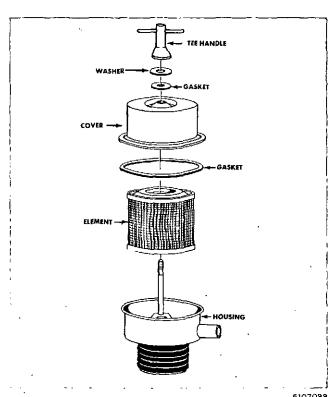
Crankcase breather – paper element – bottle stopper type
